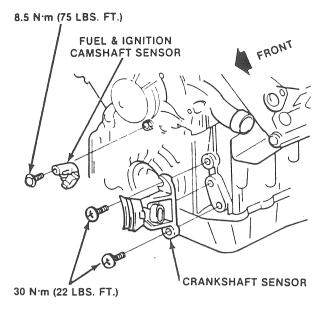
V-6 cam and crankshaft sensors for a 3.8-liter engine. (Courtesy of General Motors Corp.)
